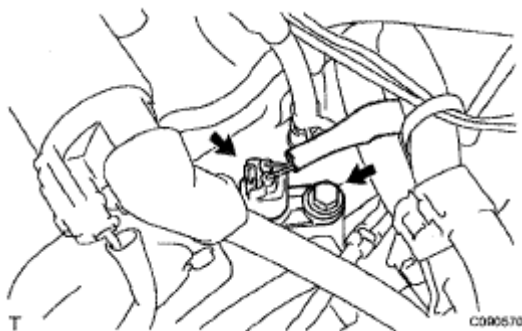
Locating Speed Sensor Bolt And Speed Sensor Connector (NC)
